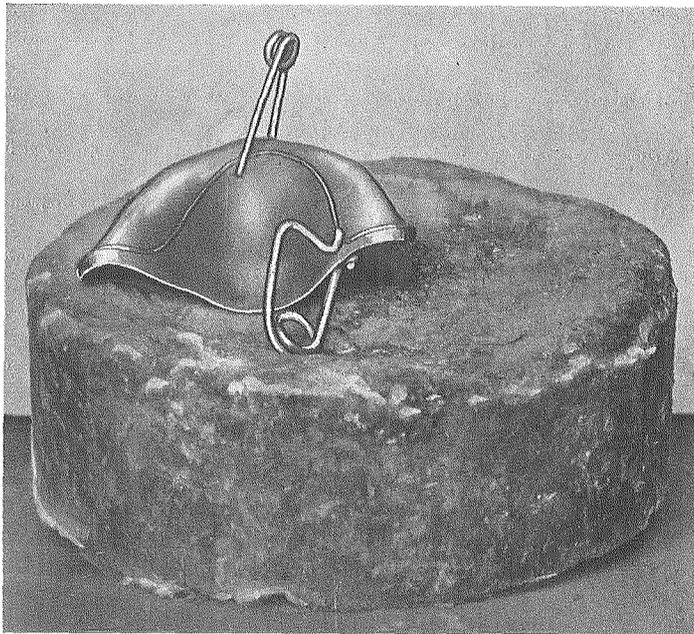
Soldering the Shoulder Wires to an Upper Base
